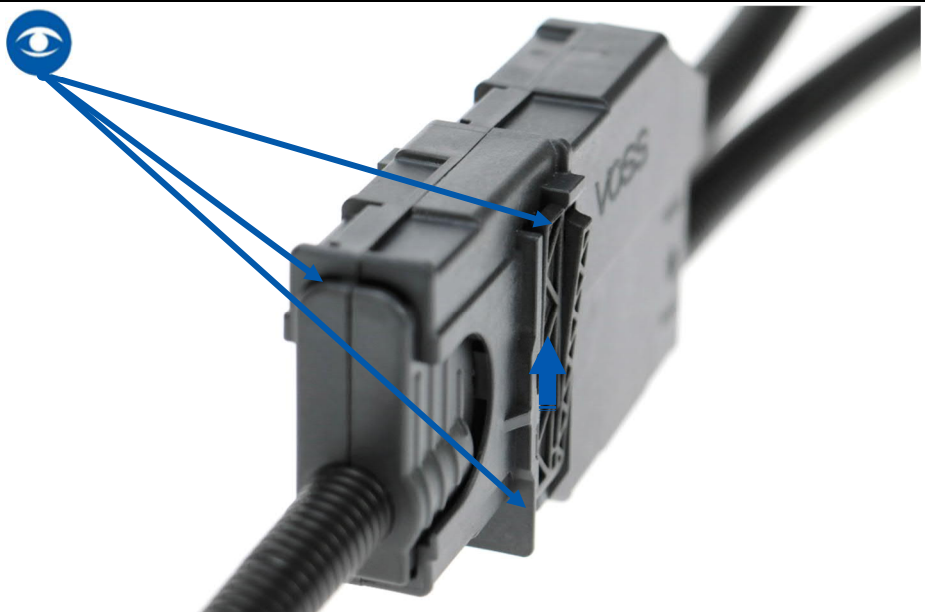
Incomplete assembly step of manifold 301 ^{EFSM} – side view
